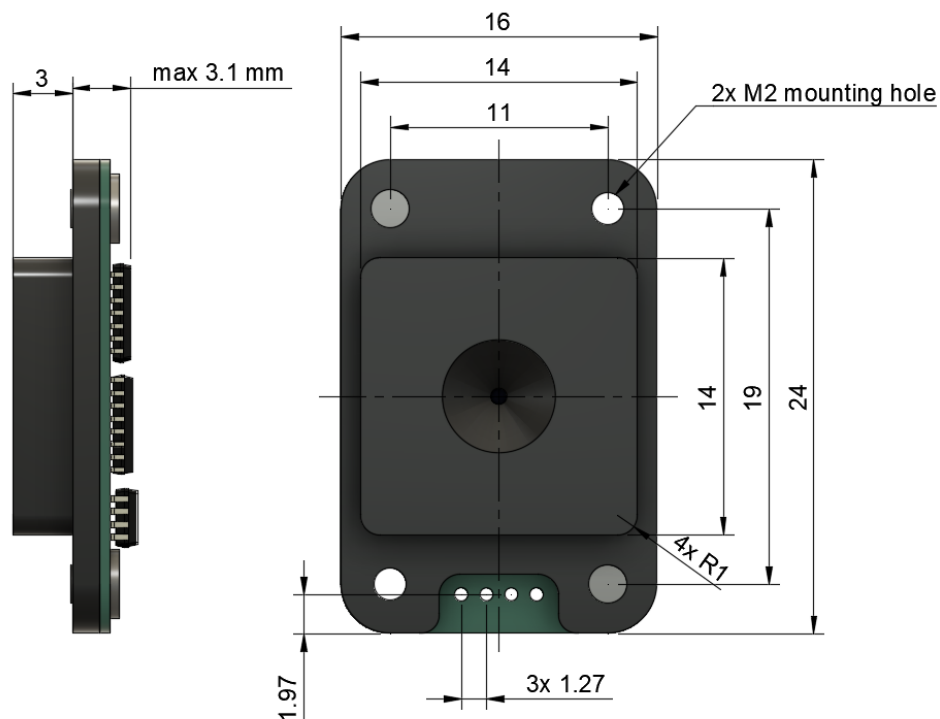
Required panel cut out for the module. The preferred holes for panel mounting are top-right and bottom-left holes.
